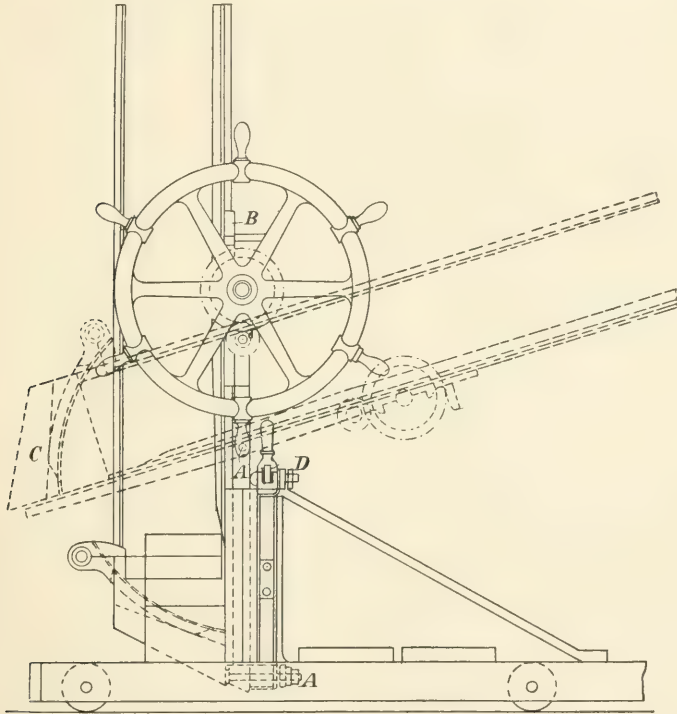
Karl Weitzmann's Peat-cutting Machine—Side Elevation.
